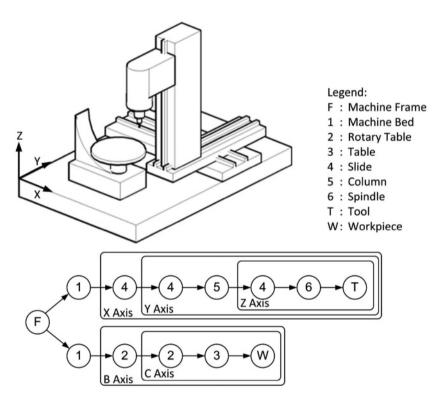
Kinematic chain representation of 5-axis machining centre (adapted from [12.8])
